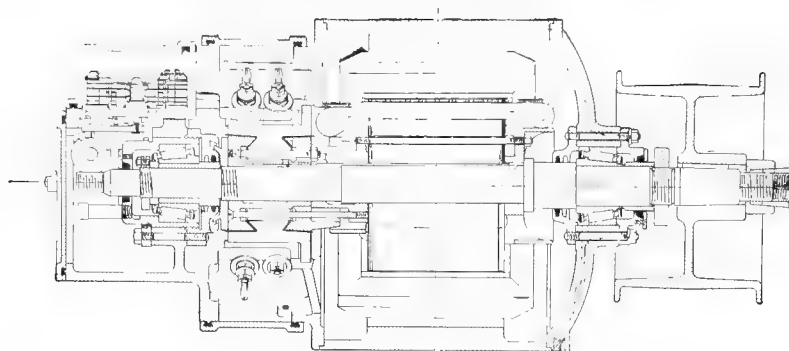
Section Through Dynamo with Timken Roller Bearings.
